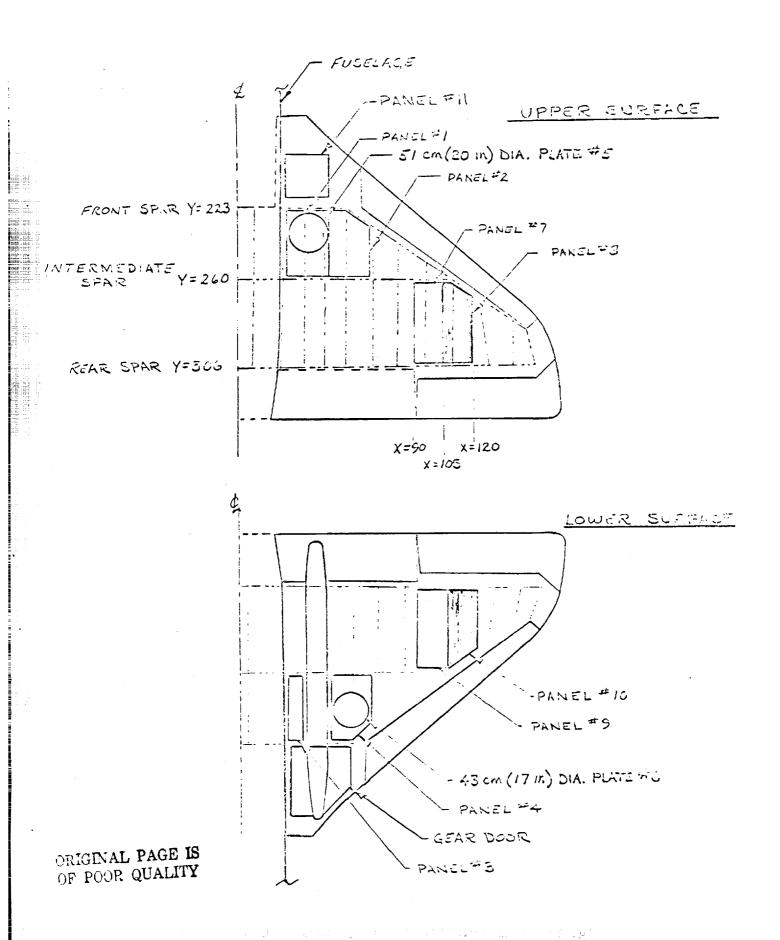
HOLE CONFIGURATION #9. PANELS 8&10 REMOVED.
